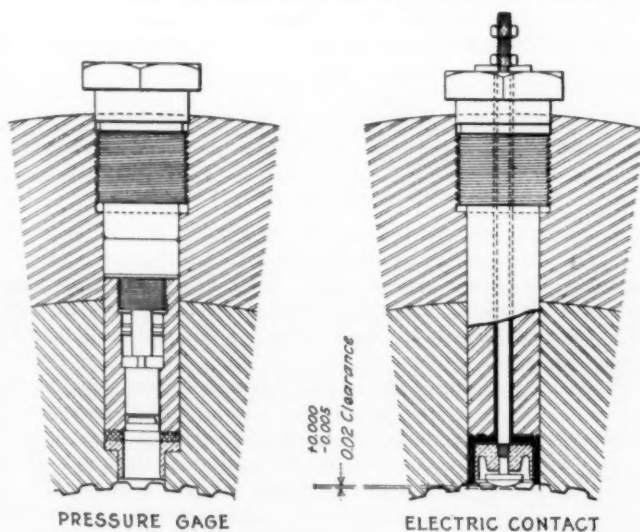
DETAILS OF CONSTRUCTION OF CONTACTS AND PRESSURE GAGES
